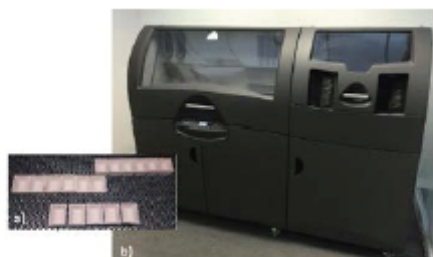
a) Printed specimens; b) FEUP's ProJet 660 PRO Series machine.
